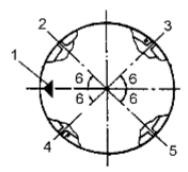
Identifying Piston Ring Position Courtesy of SUZUKI OF AMERICA CORP.
